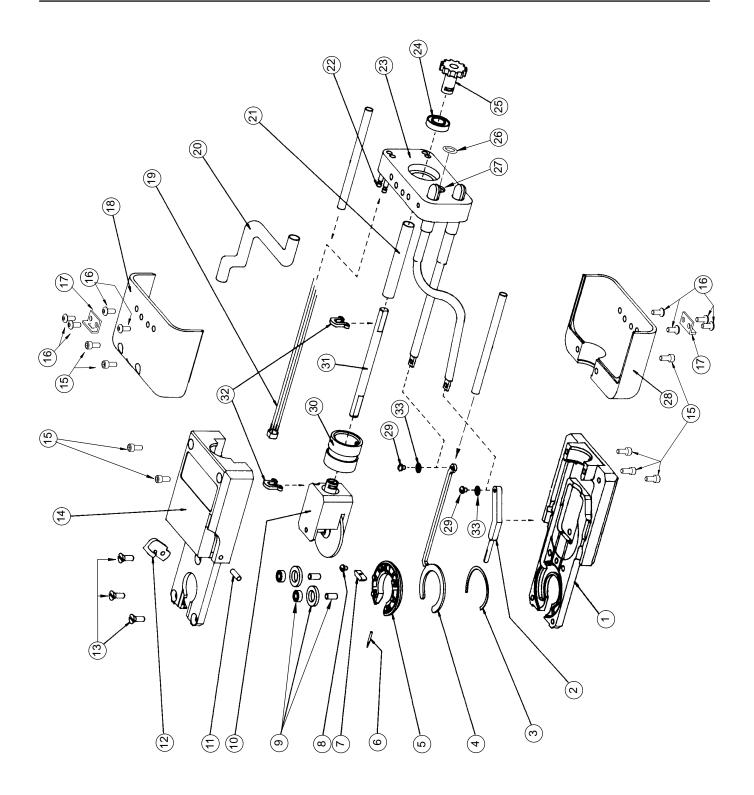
CWS-4MRH-A Rigid Micro Weld Head
